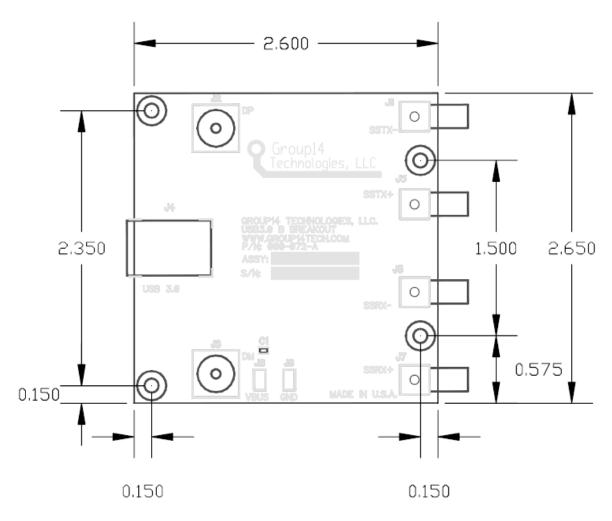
USB30B2SMA Breakout Physical Dimensions (Dimensions are in Inches)
